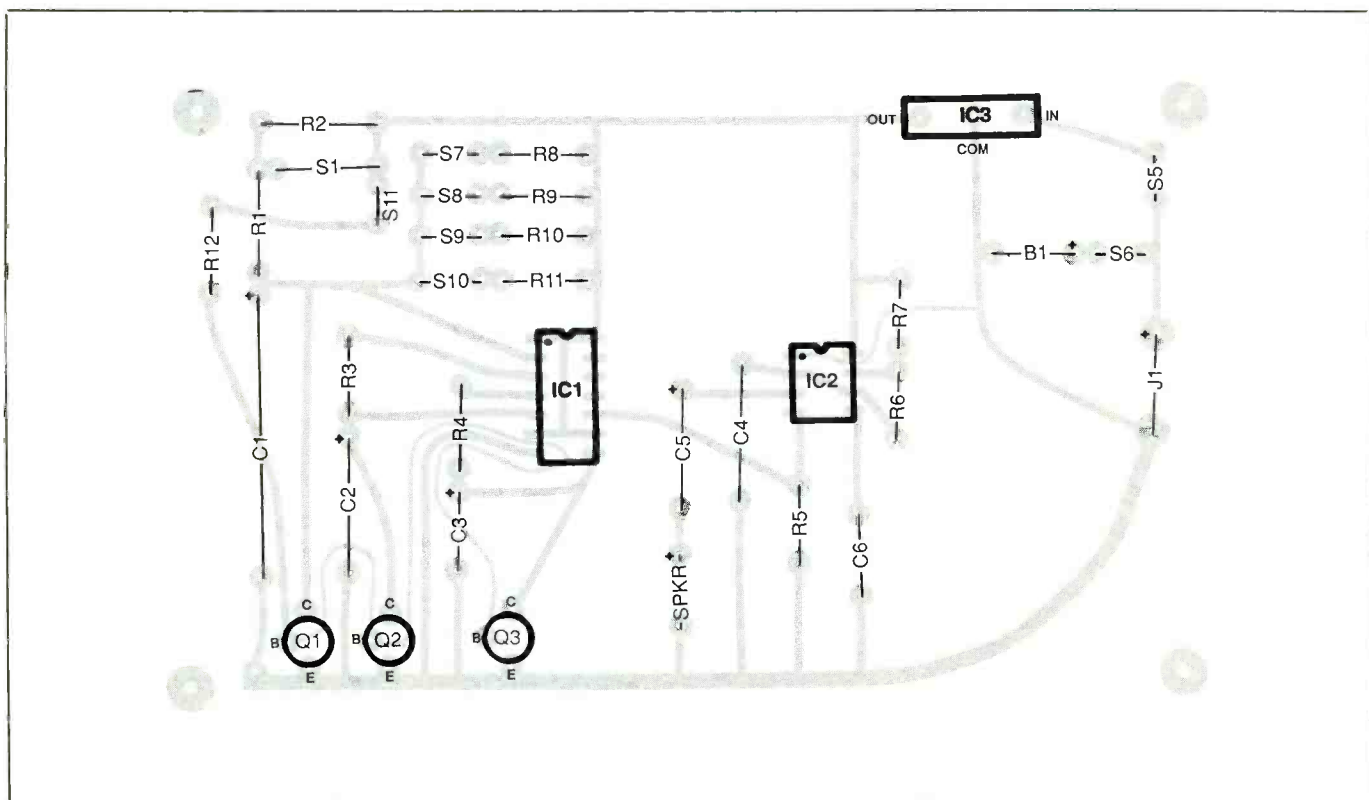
Wiring diagram for pc board (use this as a rough guide to component layout if you use perforated-board construction). If you incorporate multiple nap-time selec-
